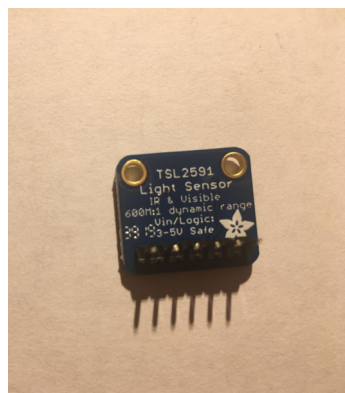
Finished bottom side of the Lux Sensor with 6-pin male headers soldered on.
